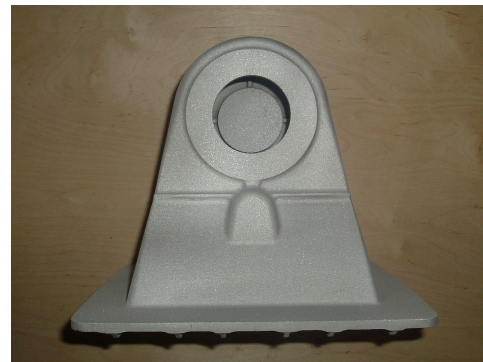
Prototype casting “housing”. Cast in AZ91E with 2 mm minimum wall thickness.
